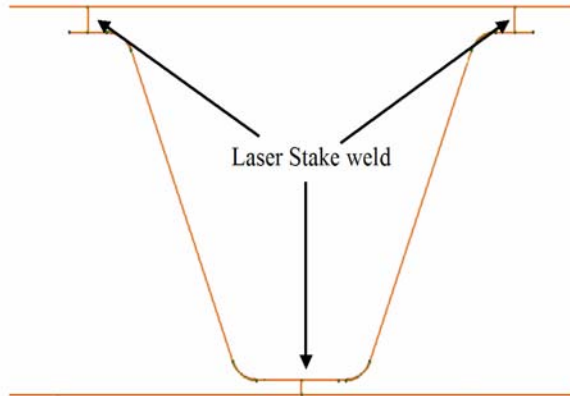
Sandwich Panel Layout and Connection to Floor Beam
